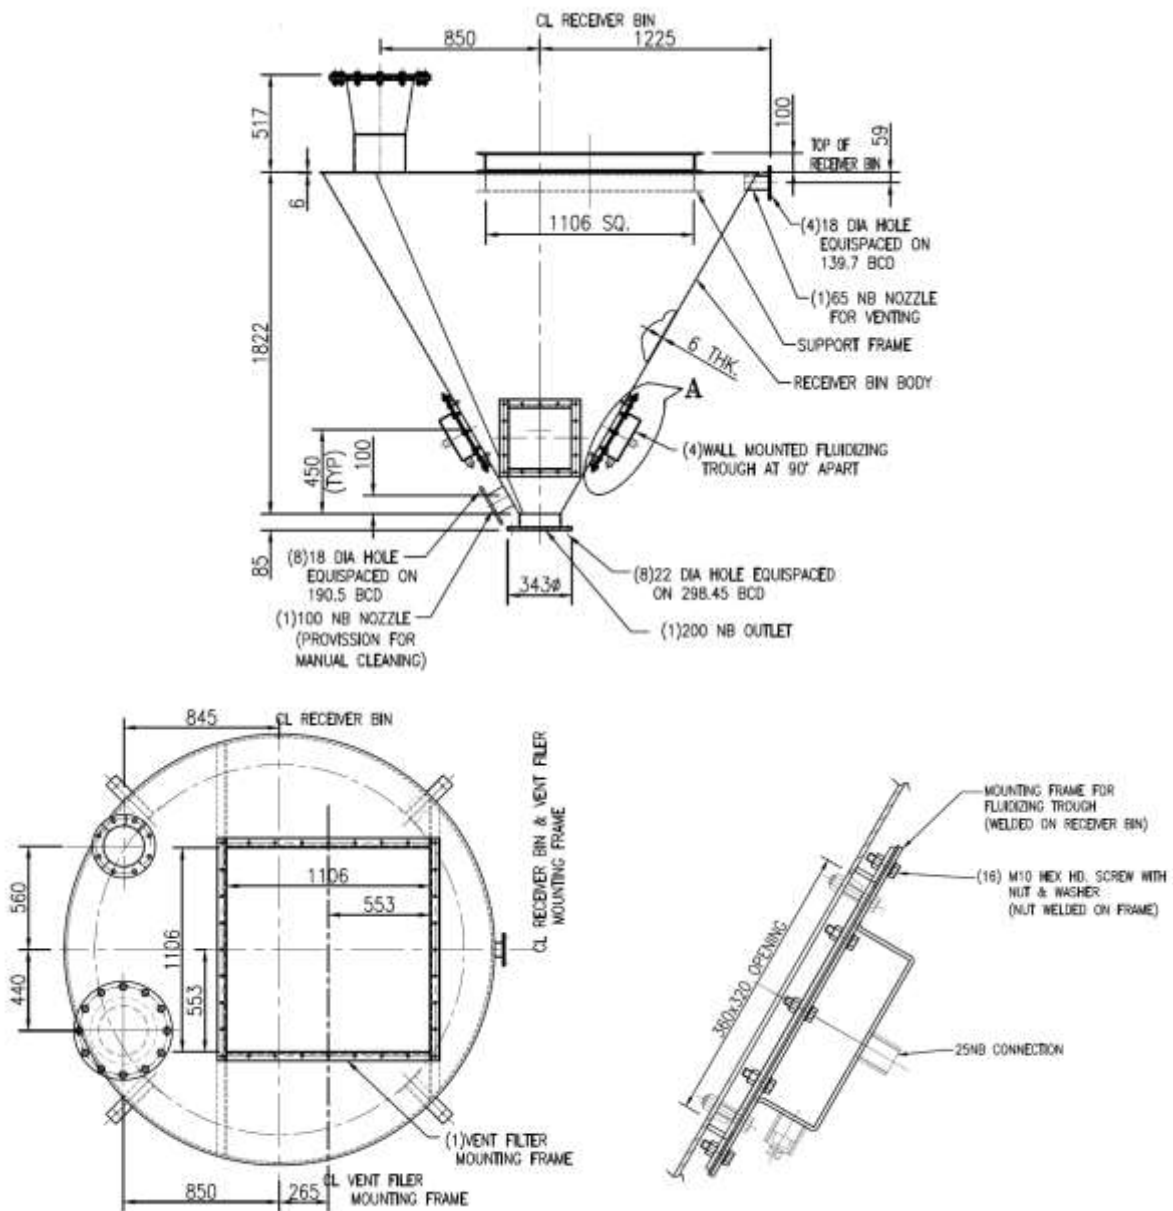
Design drawings of the receiver bin and trough type fluidizer
